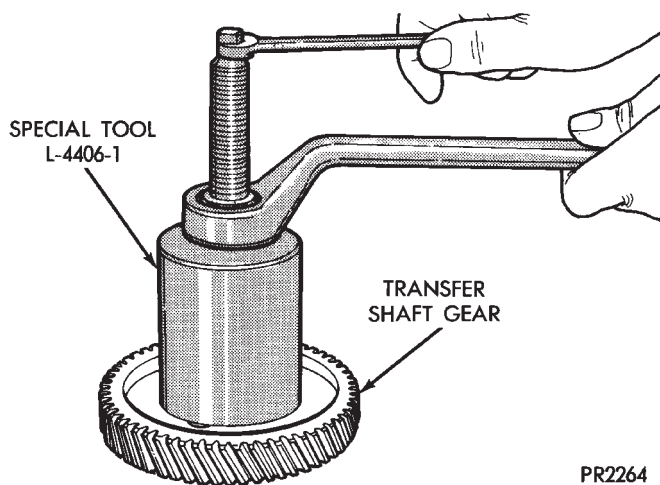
Install Transfer Shaft Gear Bearing Cone
